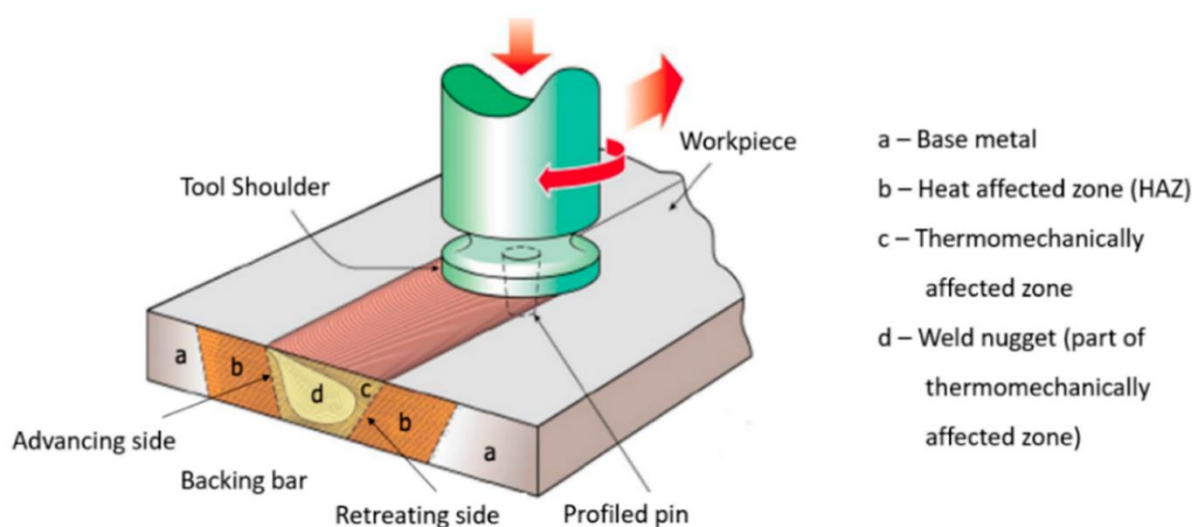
Weld zones in butt joint obtained from FSW process [63].
